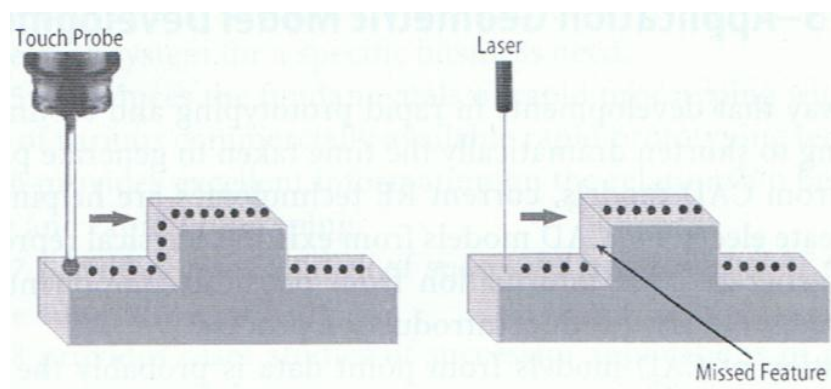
Contact scanner with touch probe and non-contact scanner with laser beam
